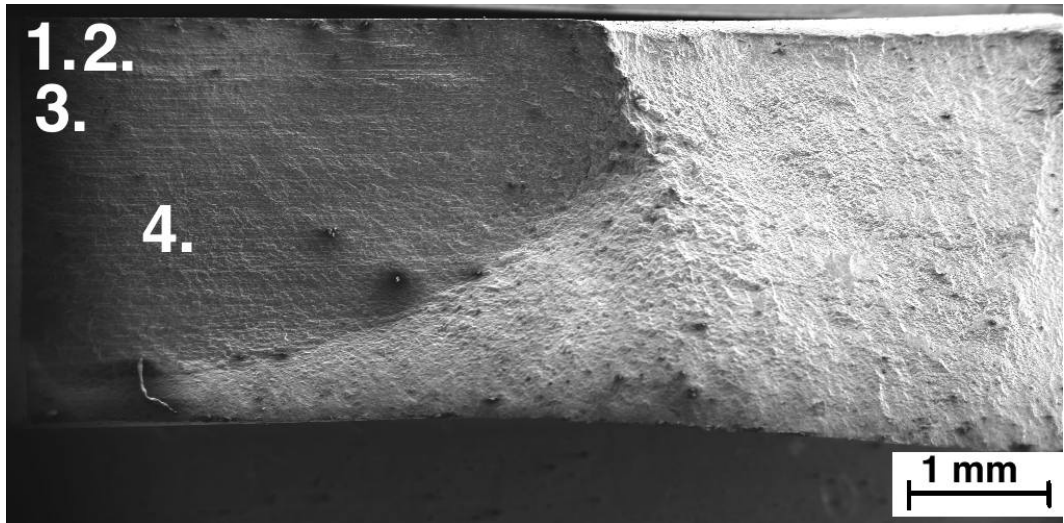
Overview of the fracture surface AA6082.52-T6 base material with most cycles to fracture. The numbers represent the different areas investigated further below.
